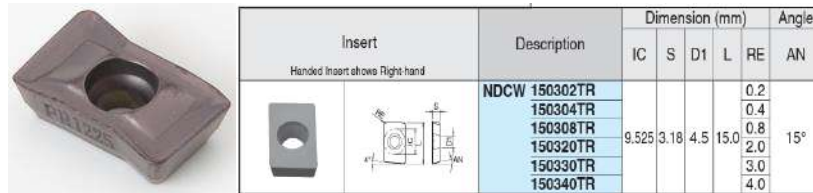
Insert Carbide of End Mill DMC-316SXT used to cut the specimen
